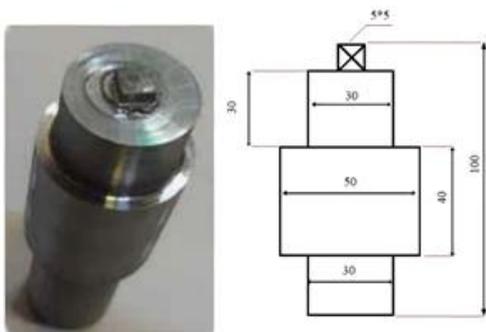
Cylindrical welding tool made of hot steel working with a square pin
